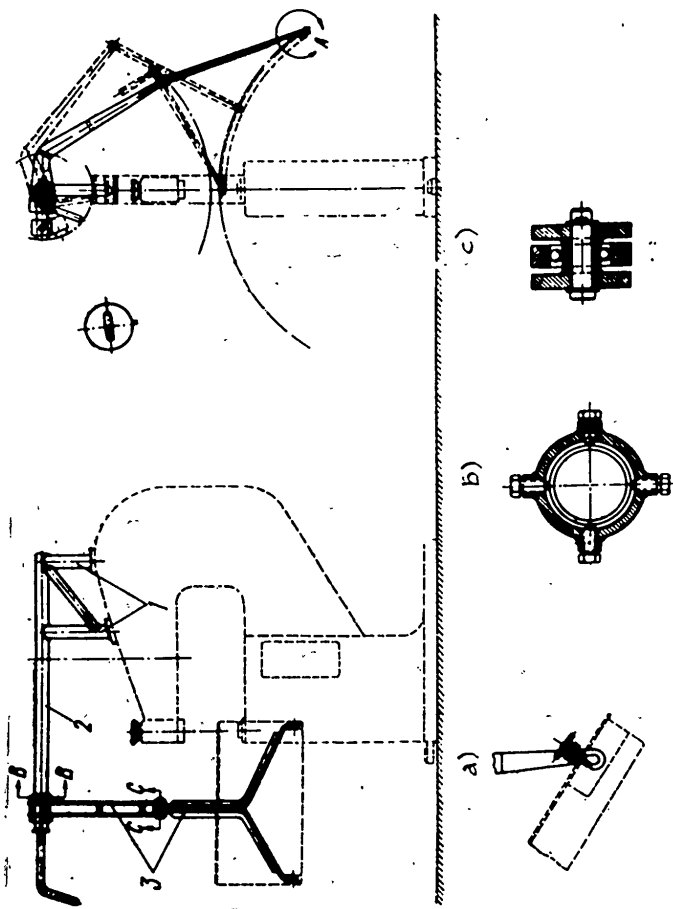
Equipment Mounted to the Housing of the Press for Support and
